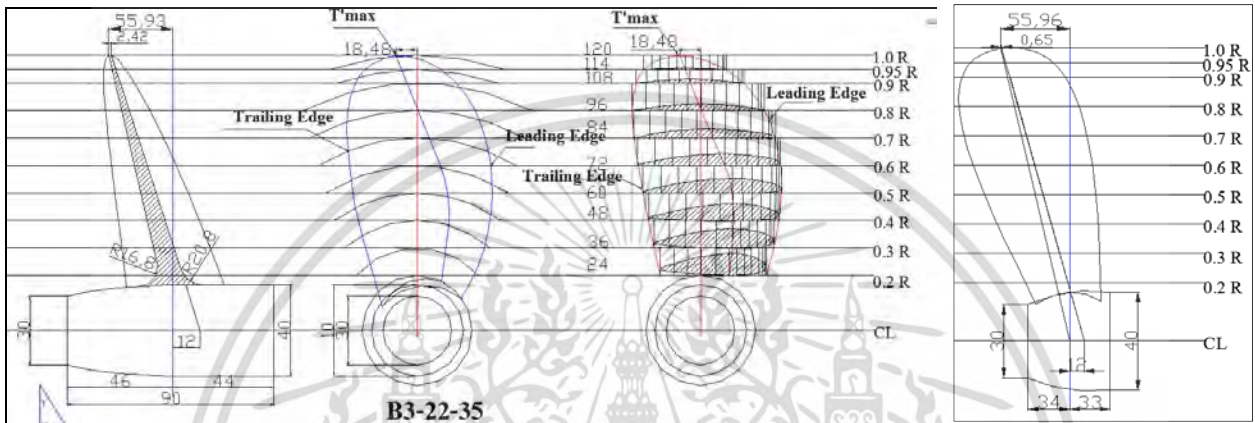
Drawing Design 3 Blades Type 22° Skew Angle Developed Area 35(New Design, Model-A)
